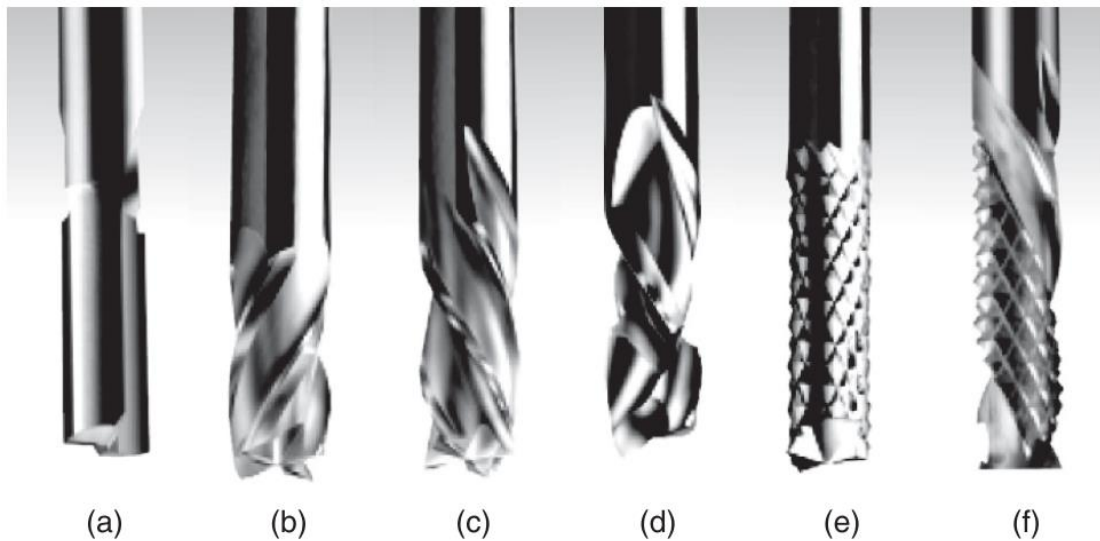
Geometry tools for milling composite materials (a) Straight flute (b) upcut helical tool (c) downcut helical tool (d) double spiral compression tool (e) burr tool (f) fluted bur (adapted from [22])
